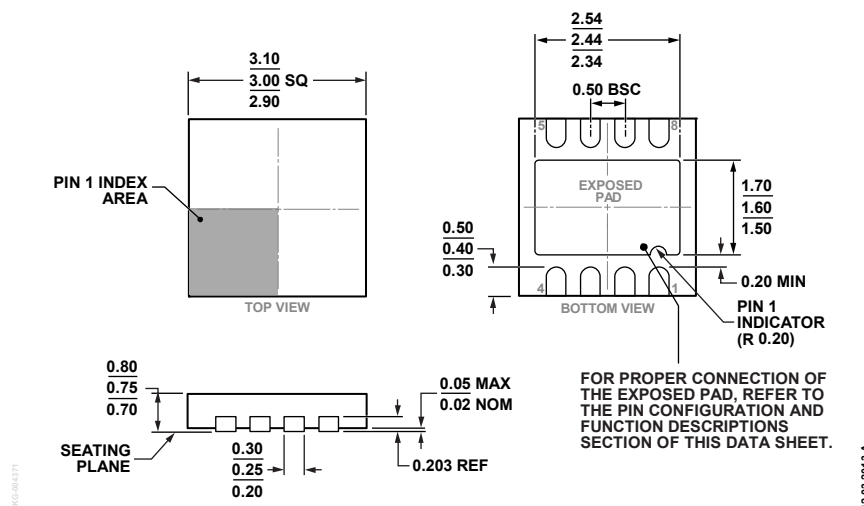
8-Lead Lead Frame Chip Scale Package [LFCSP]
